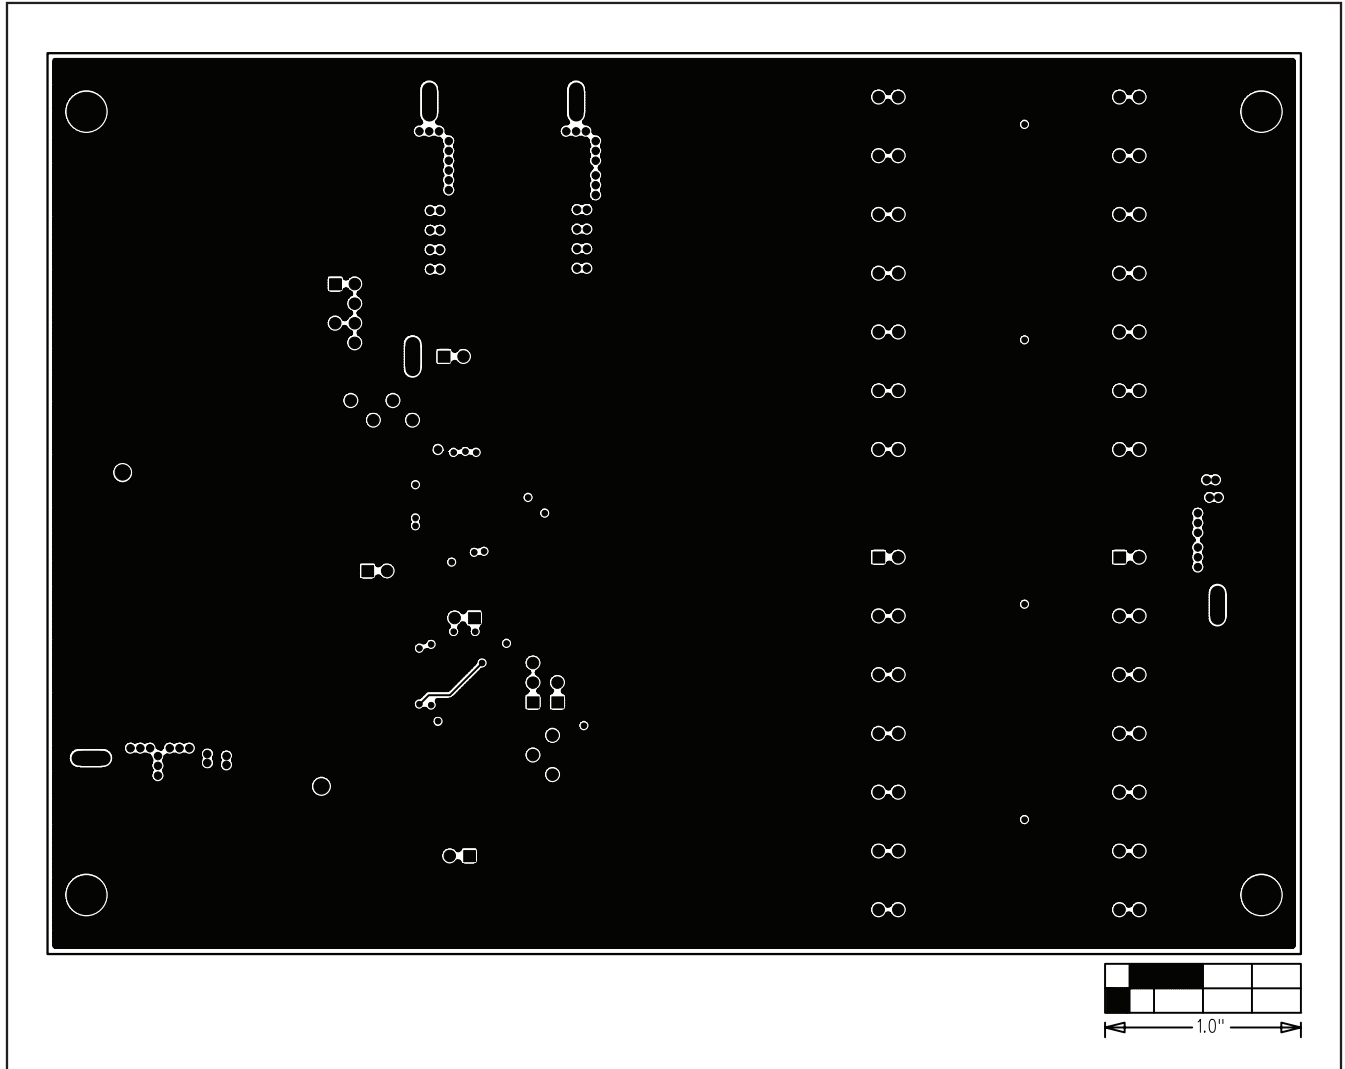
MAX1215N EV Kit PCB Layout—Solder Side
